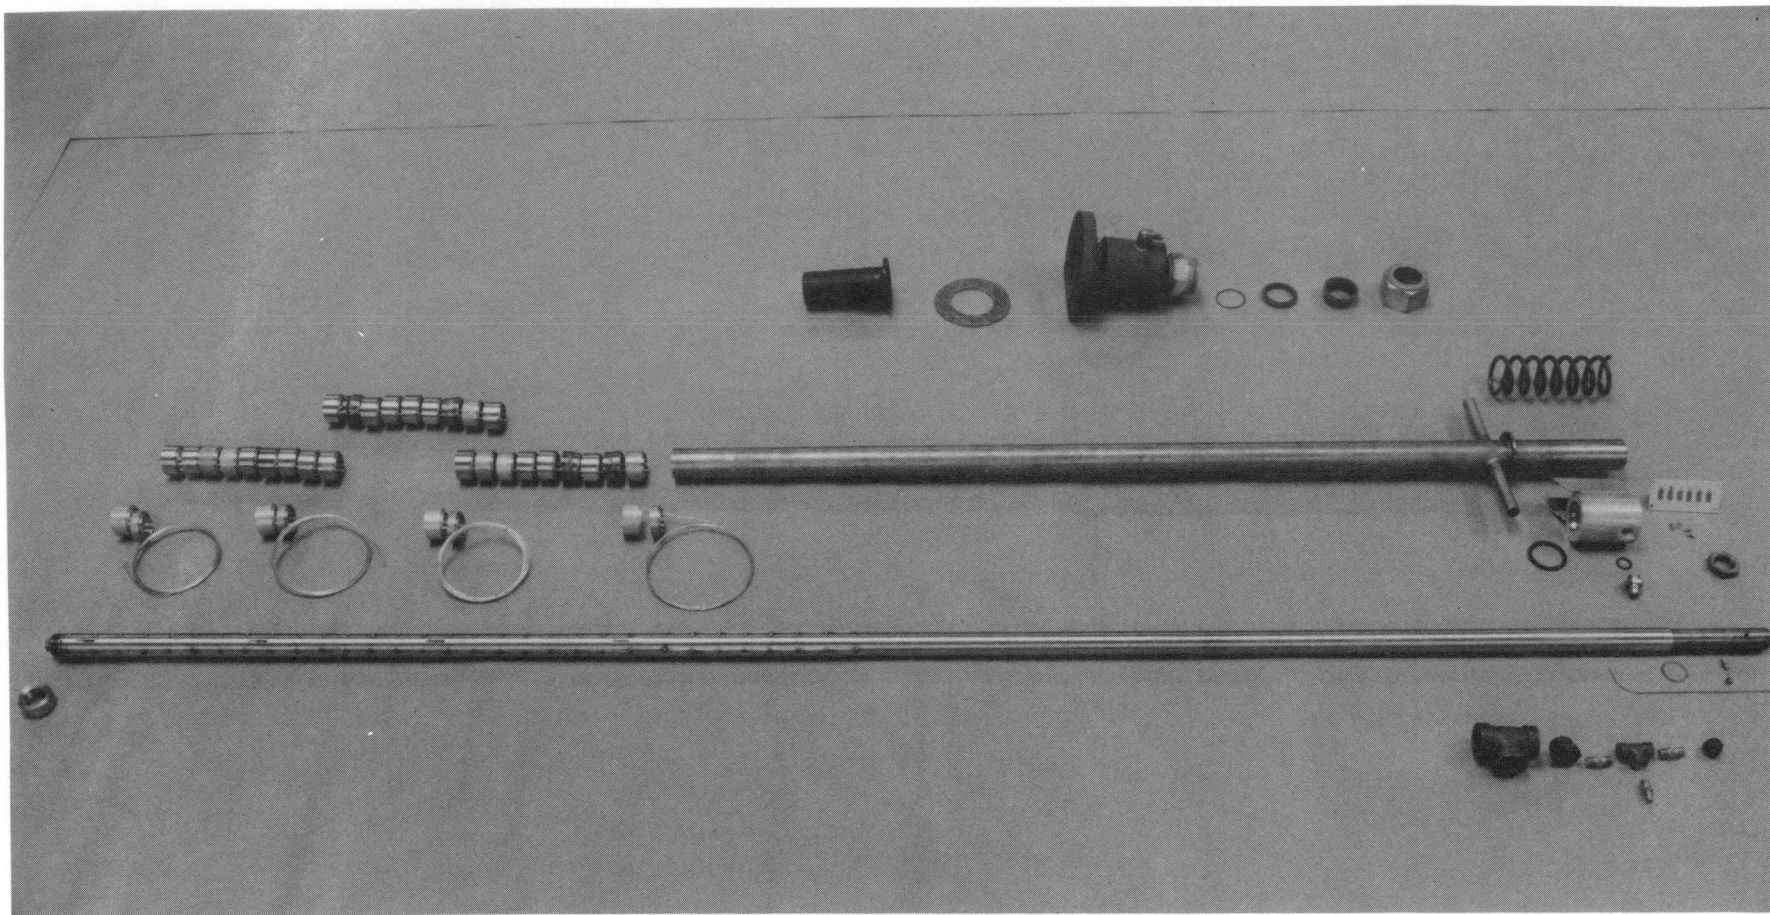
Components of a Material Specimen Probe (typical arrangement of ring specimens and thermocouple rings shown at upper left)
